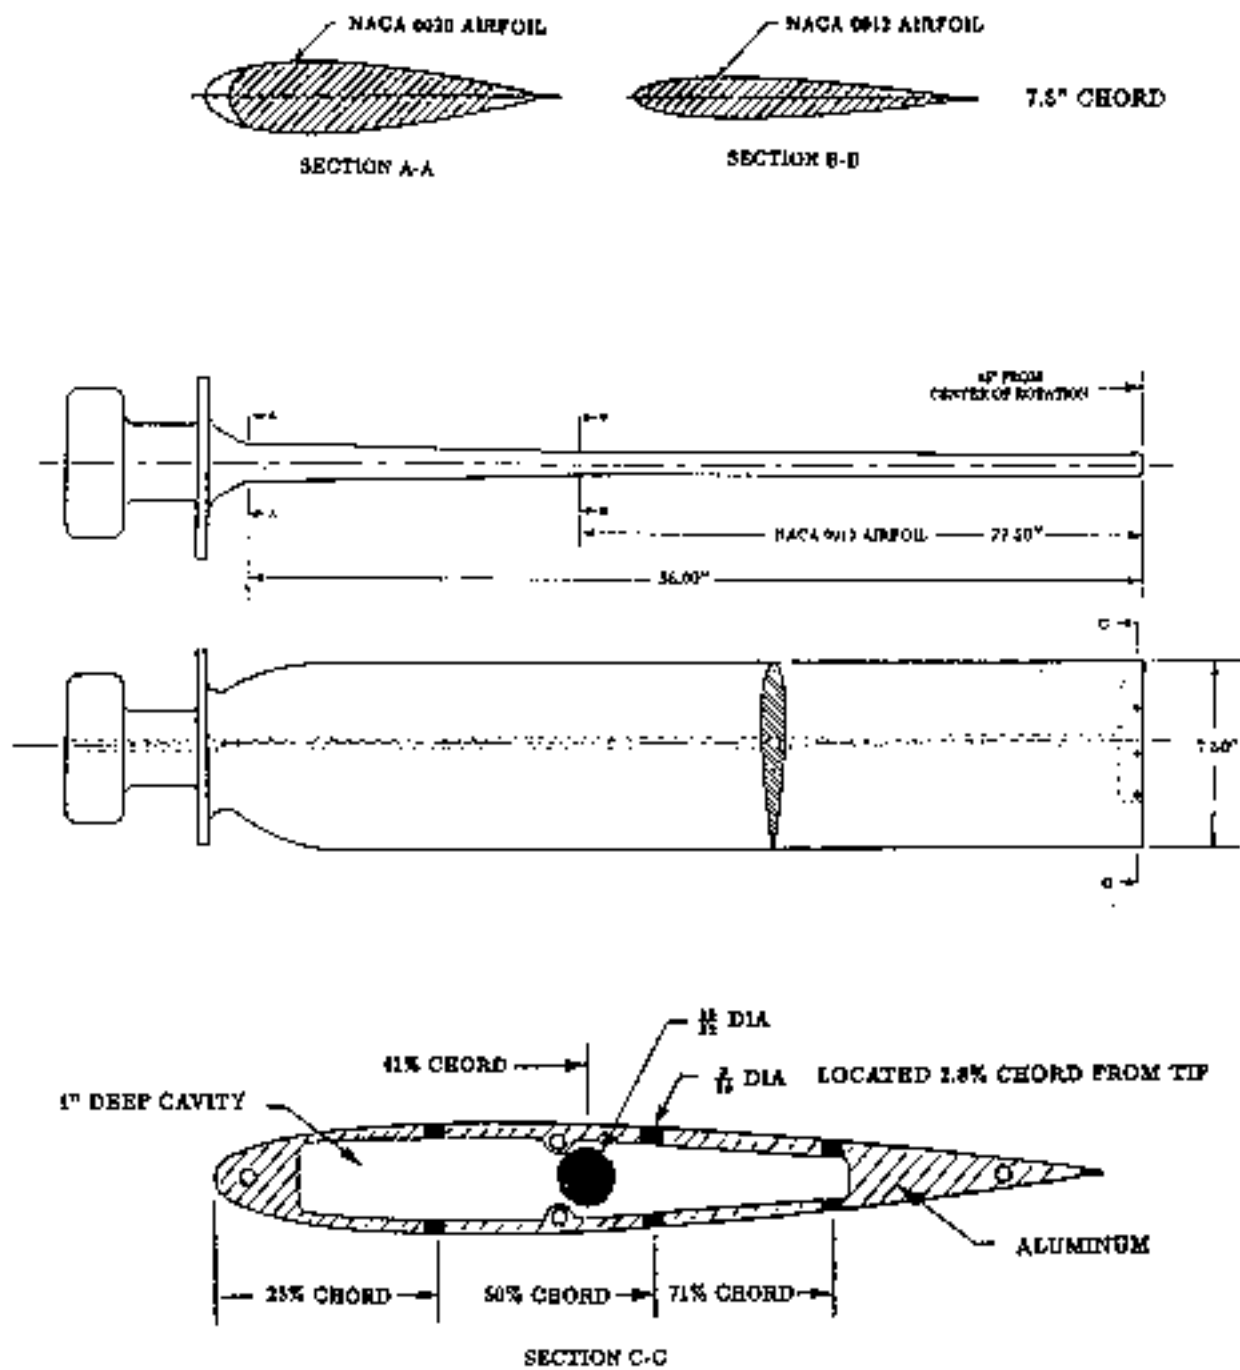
Rotor blade with radial passage and tip plenum for seed particles.
